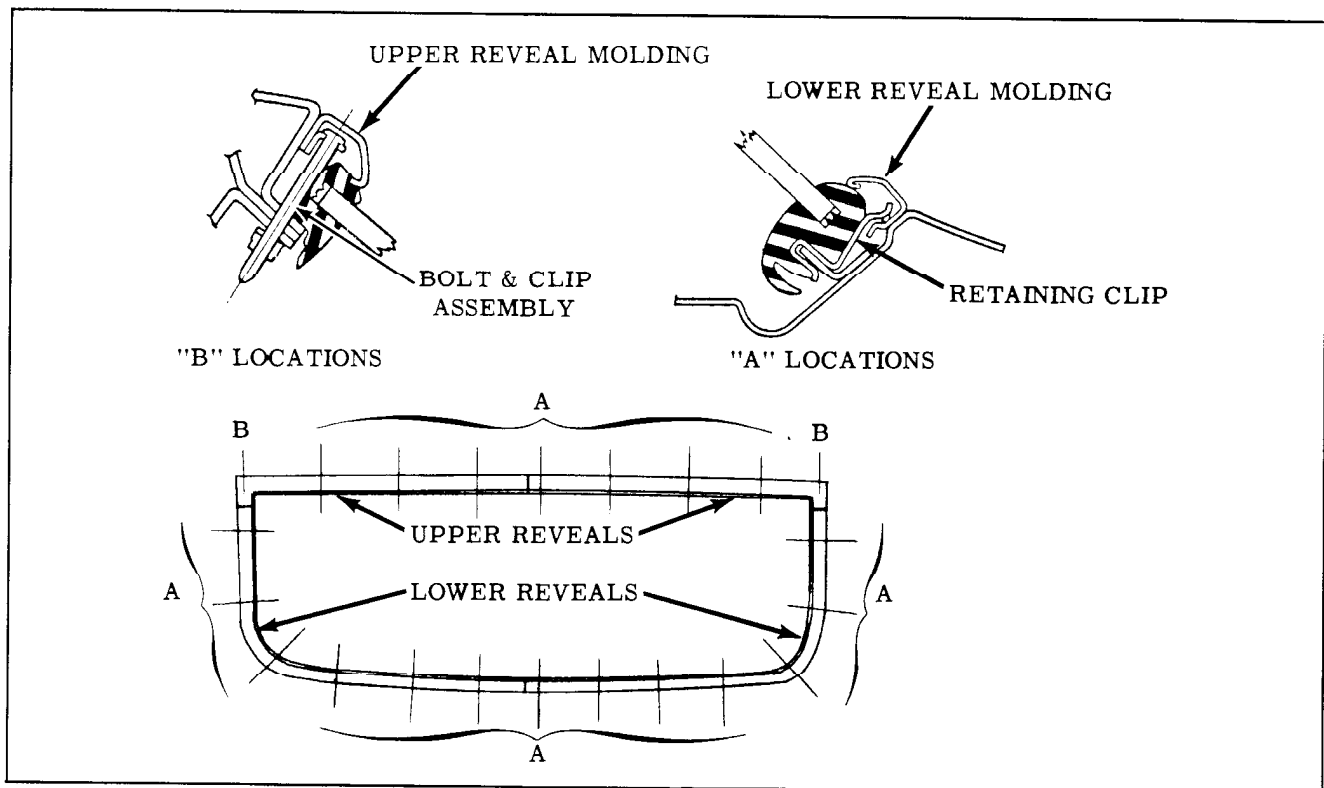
Back Window Reveal Moldings ("69" Styles)
